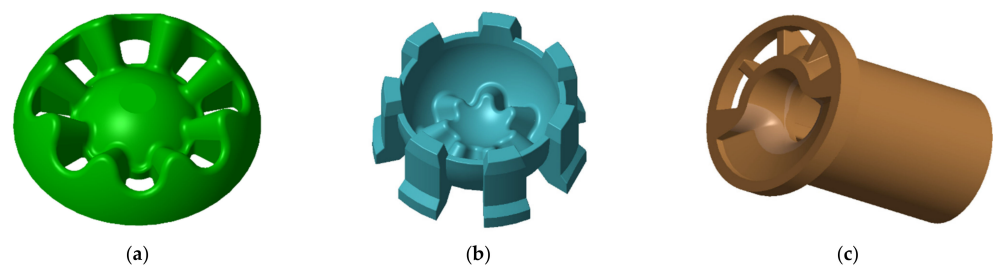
Rotor (a), stator (b) and hollow shaft (c) of the TMC pump.
